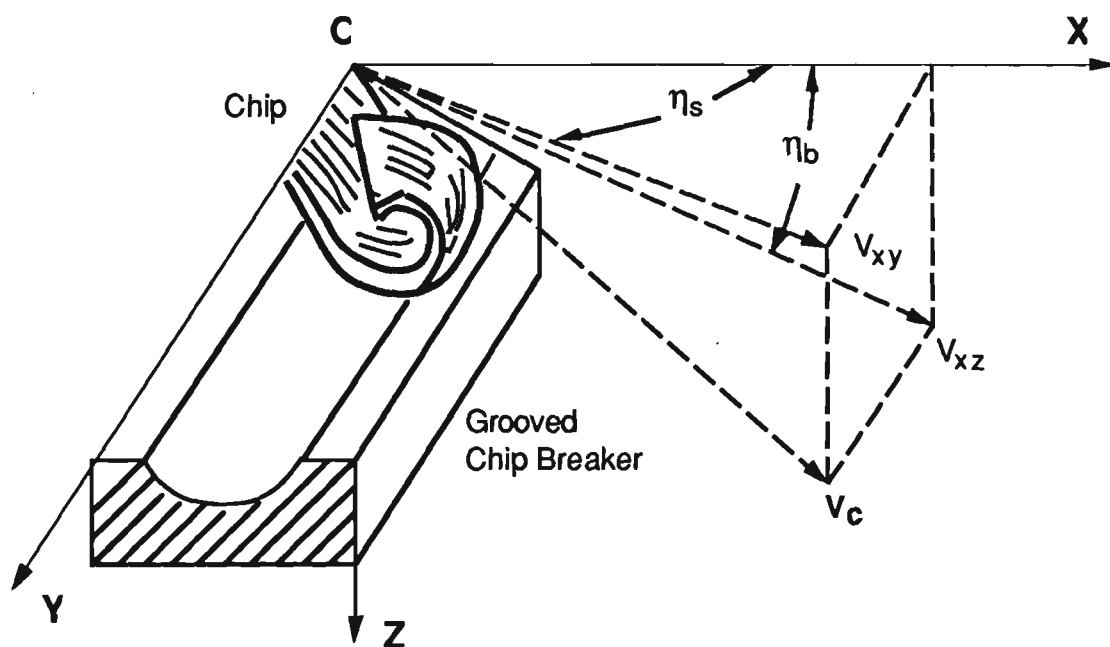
Three dimensional chip flow with a grooved chip breaker
